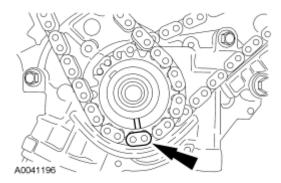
Aligning Copper (Marked) Link With Timing Mark On Crankshaft Sprocket Courtesy of FORD MOTOR CO.
